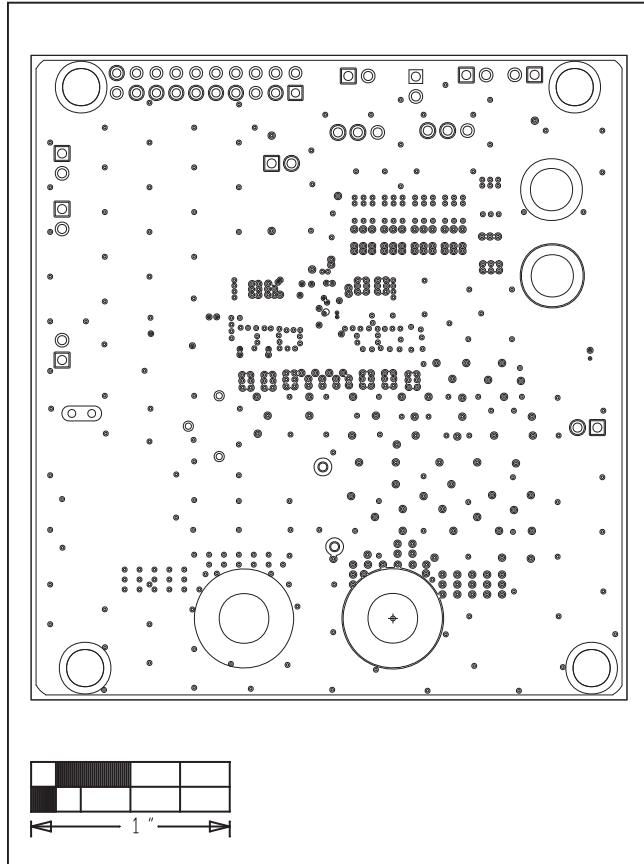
MAX20499C EV Kit PCB Layout—Inner Layer 5
